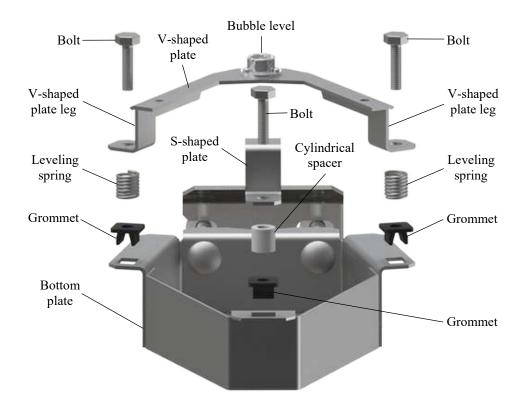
Exploded view of the CM270 Mounting Bracket Kit
